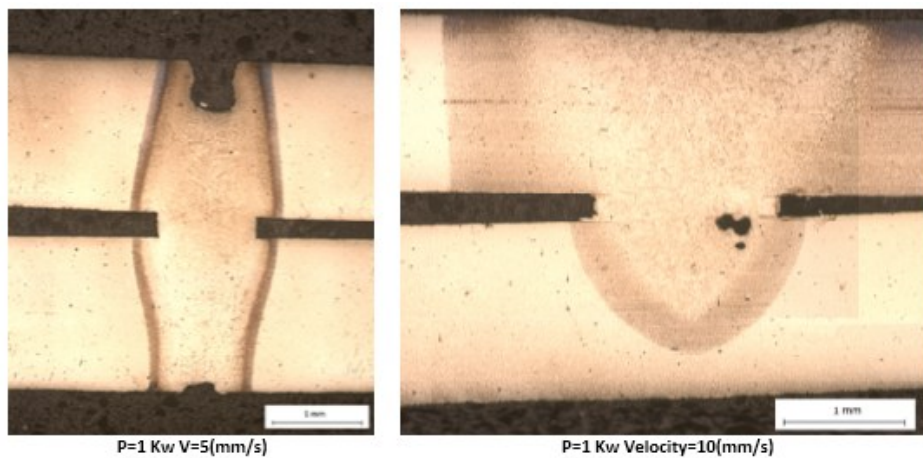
Proximity laser welding, spot dimension=0.1mm
